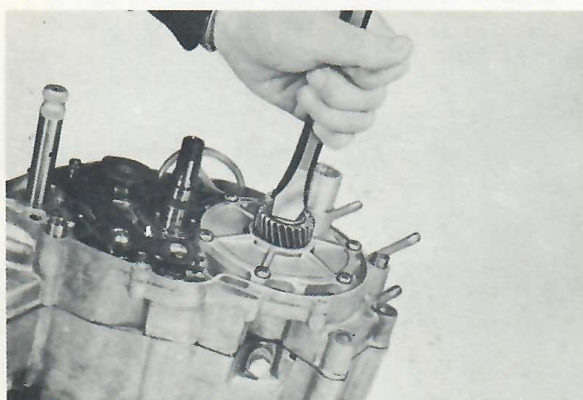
Straightening primary drive gear washer with chisel and hammer
